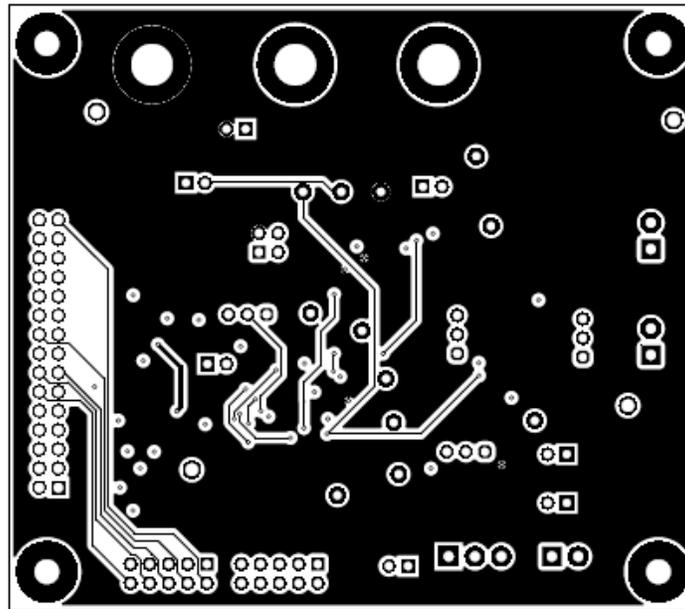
AFE881H1EVM PCB Bottom Layer Layout
